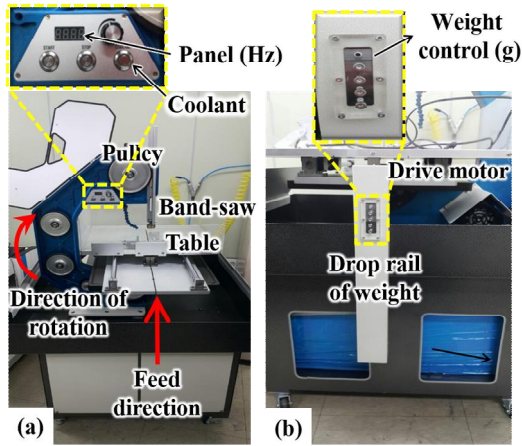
Kinematics composition of band-saw cutting machine: (a) Front view and (b) Back view photo
